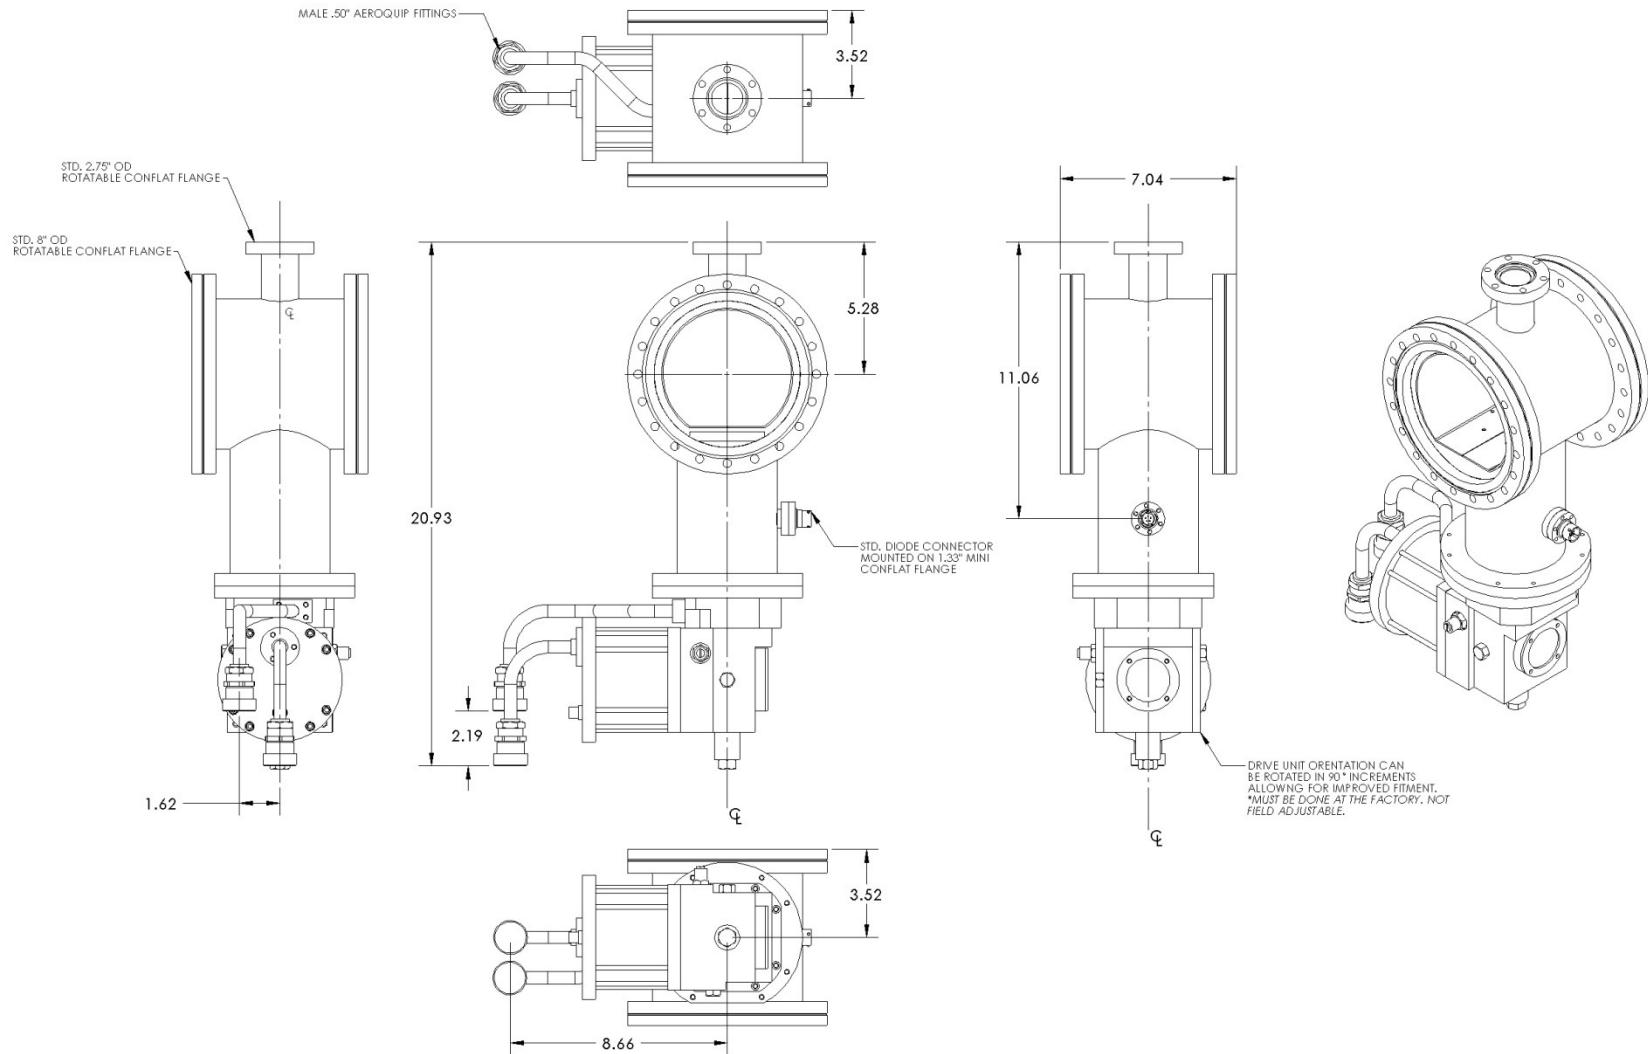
8" In-Line Cryogenic Water Pump with Rotatable CF Inlet Flanges
